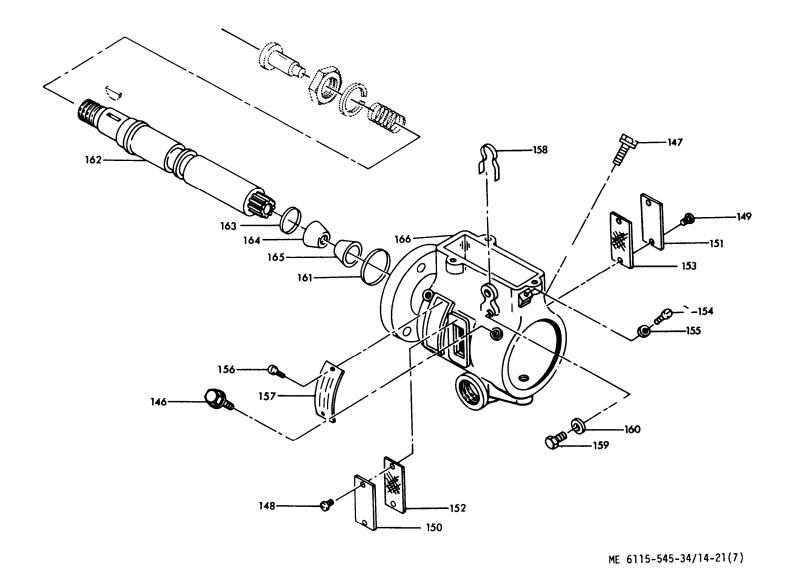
Fuel Injection Pump Assembly (Sheet 7 of 7)
